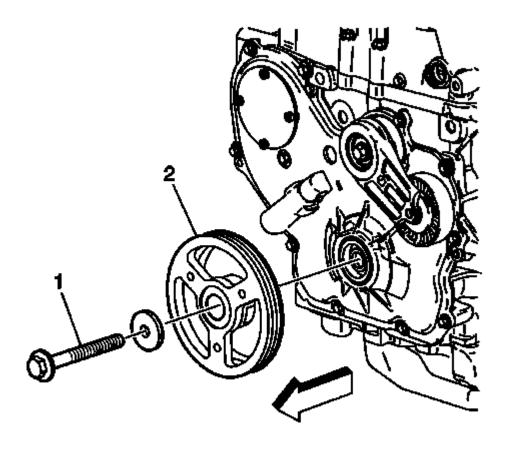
Balancer And Retaining Bolt Courtesy of GENERAL MOTORS COMPANY
